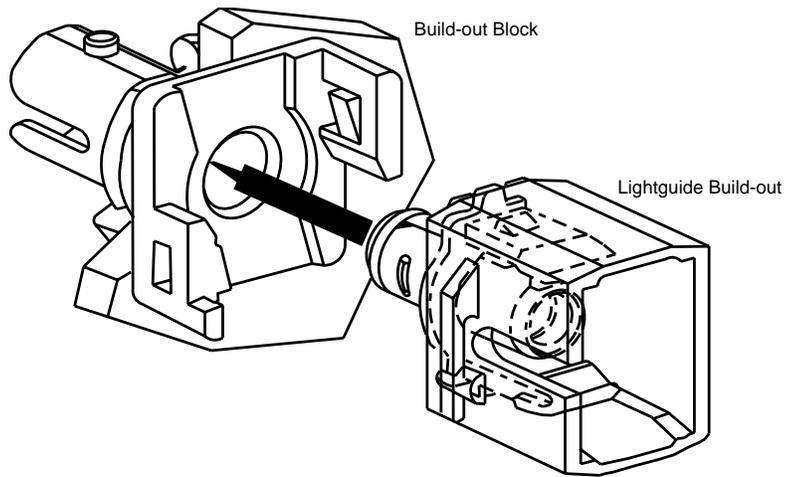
shows the buildout block and an FC-type LBO assembly.
